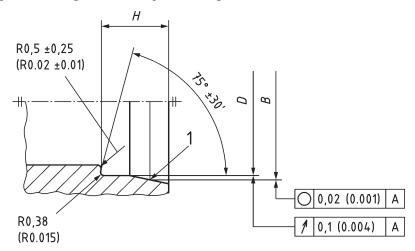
Configuration, dimensions and tolerances of fitting end design, style E (same as style G except as shown)
